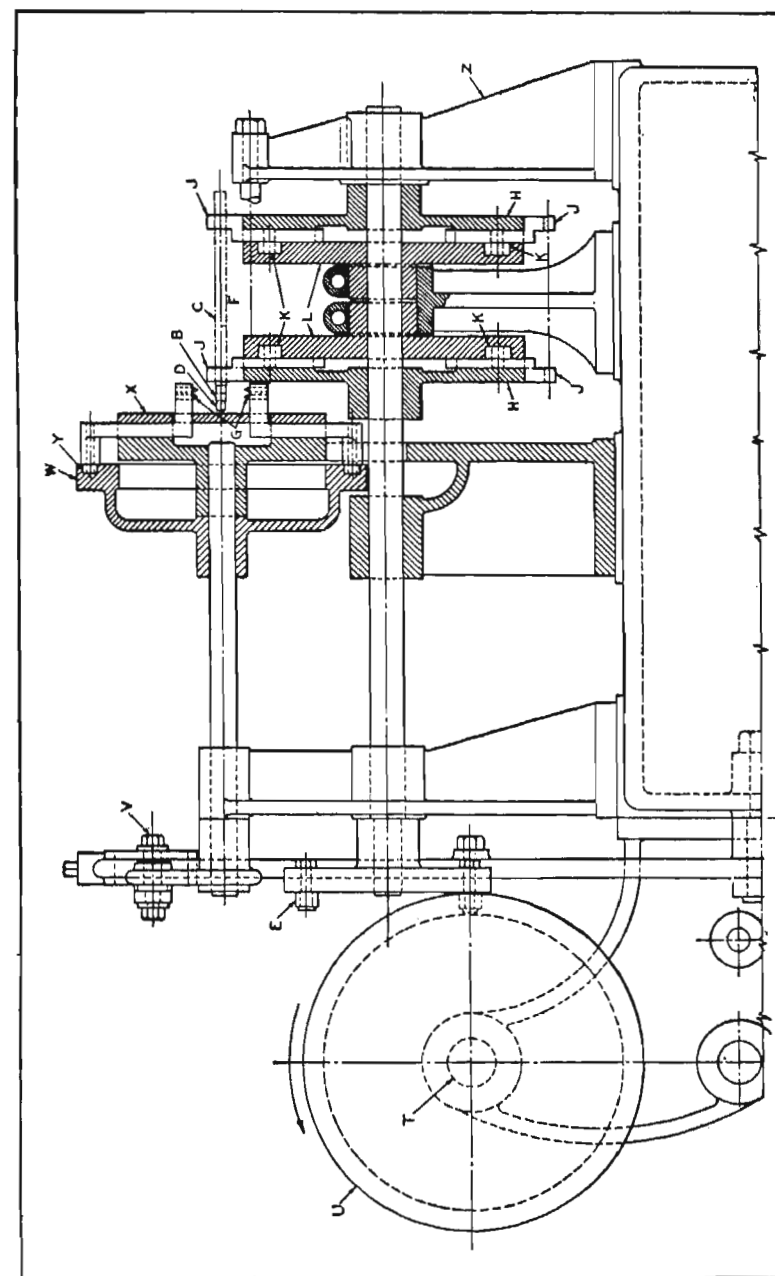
Mechanism Developed for Synchronized Operation of Dial Feed and Punches for Indenting Tubes B on Assemblies such as Shown in Fig. 6.
